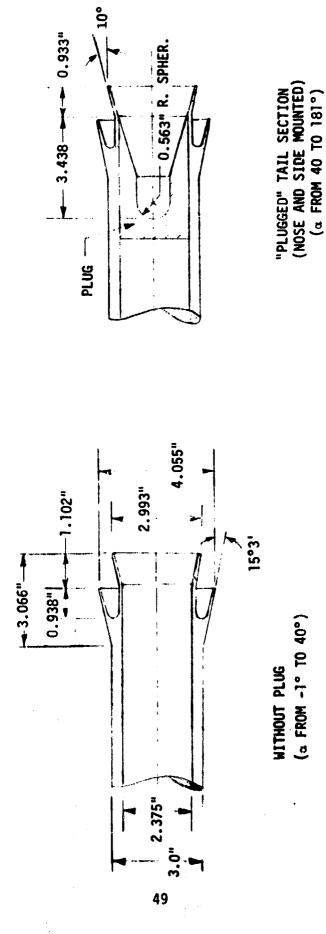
DETAILS OF SRB MODEL TAIL SECTION
